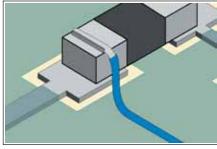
Not recommended* Wire soldered parallel or perpendicular to component.
